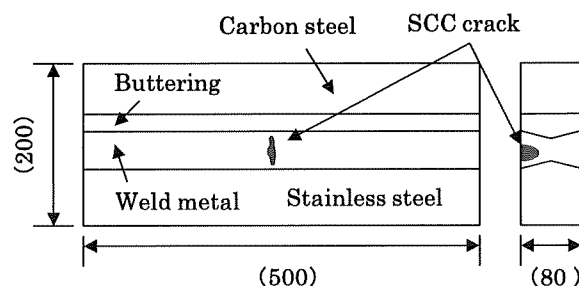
Nickel based alloy weld specimen with SCC cracks in weld metal area
